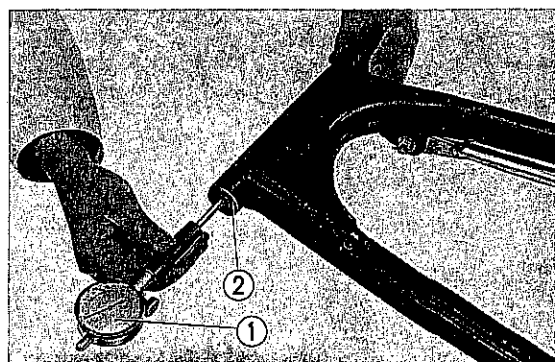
① Inside dial gauge ② Rear fork bushing
